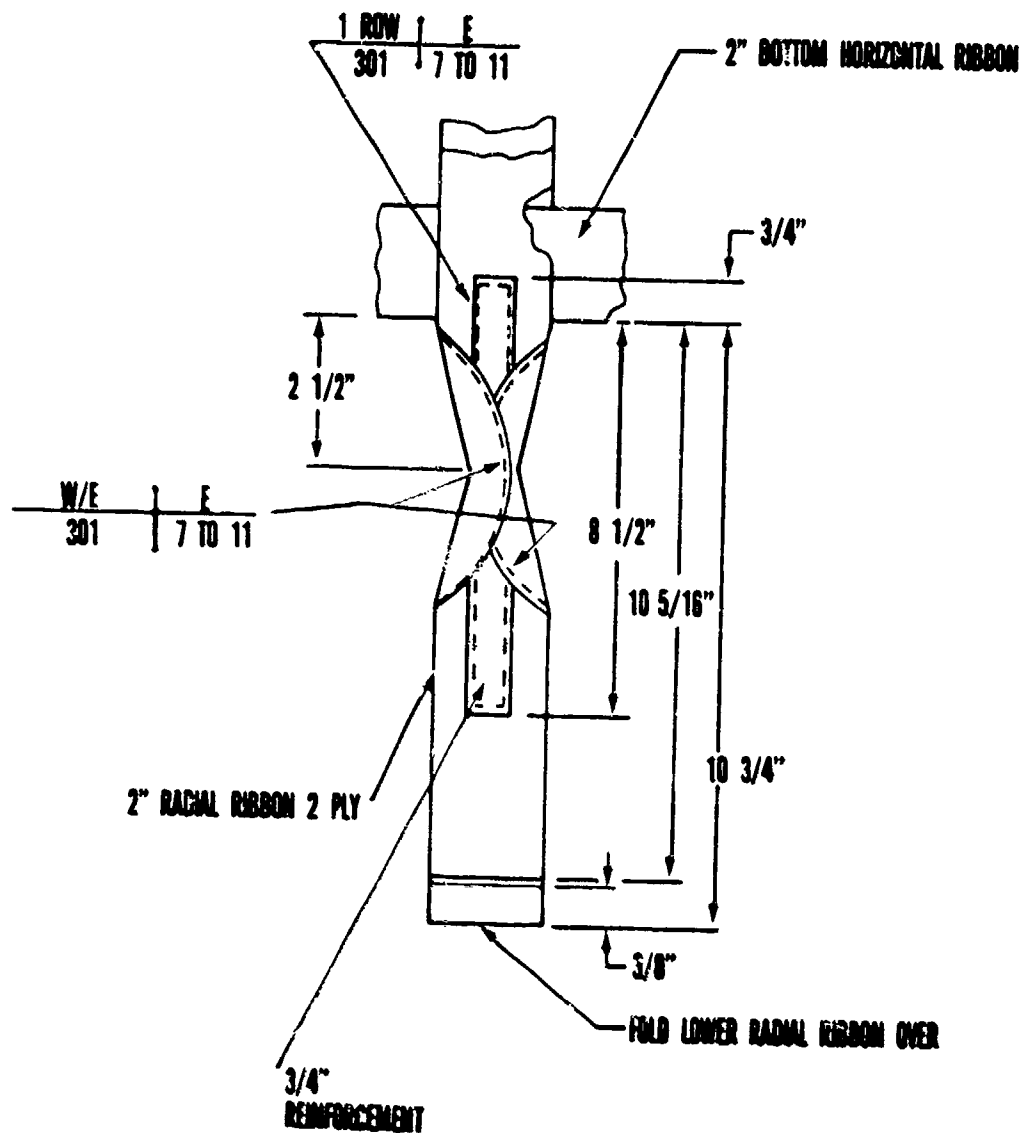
Radial to Suspension Line Joint Becket and Reinforcement Detail
